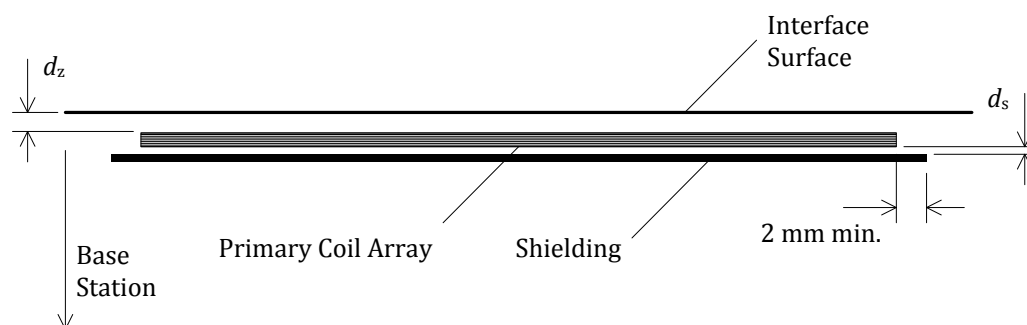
Primary Coil array assembly of Power Transmitter design B1
